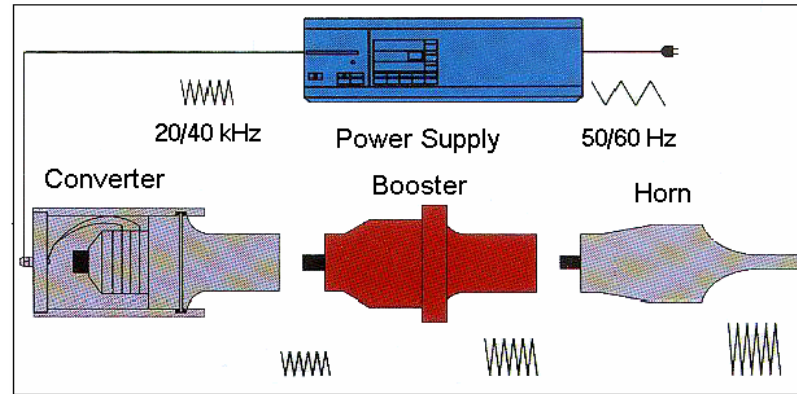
Main components of an ultrasonic welding system [3]
